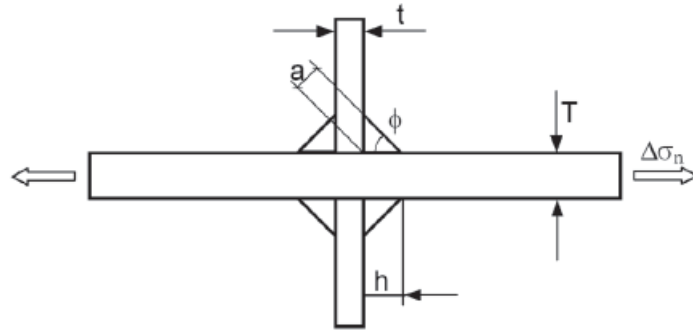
geometry of the non-load carrying fillet-welded joints.
